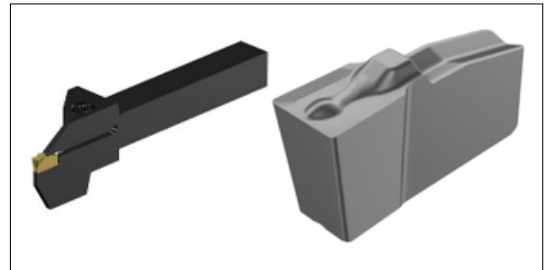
RF151.23-08-25 lathe insert holder and 25-4G 525 lathe insert. [12]
